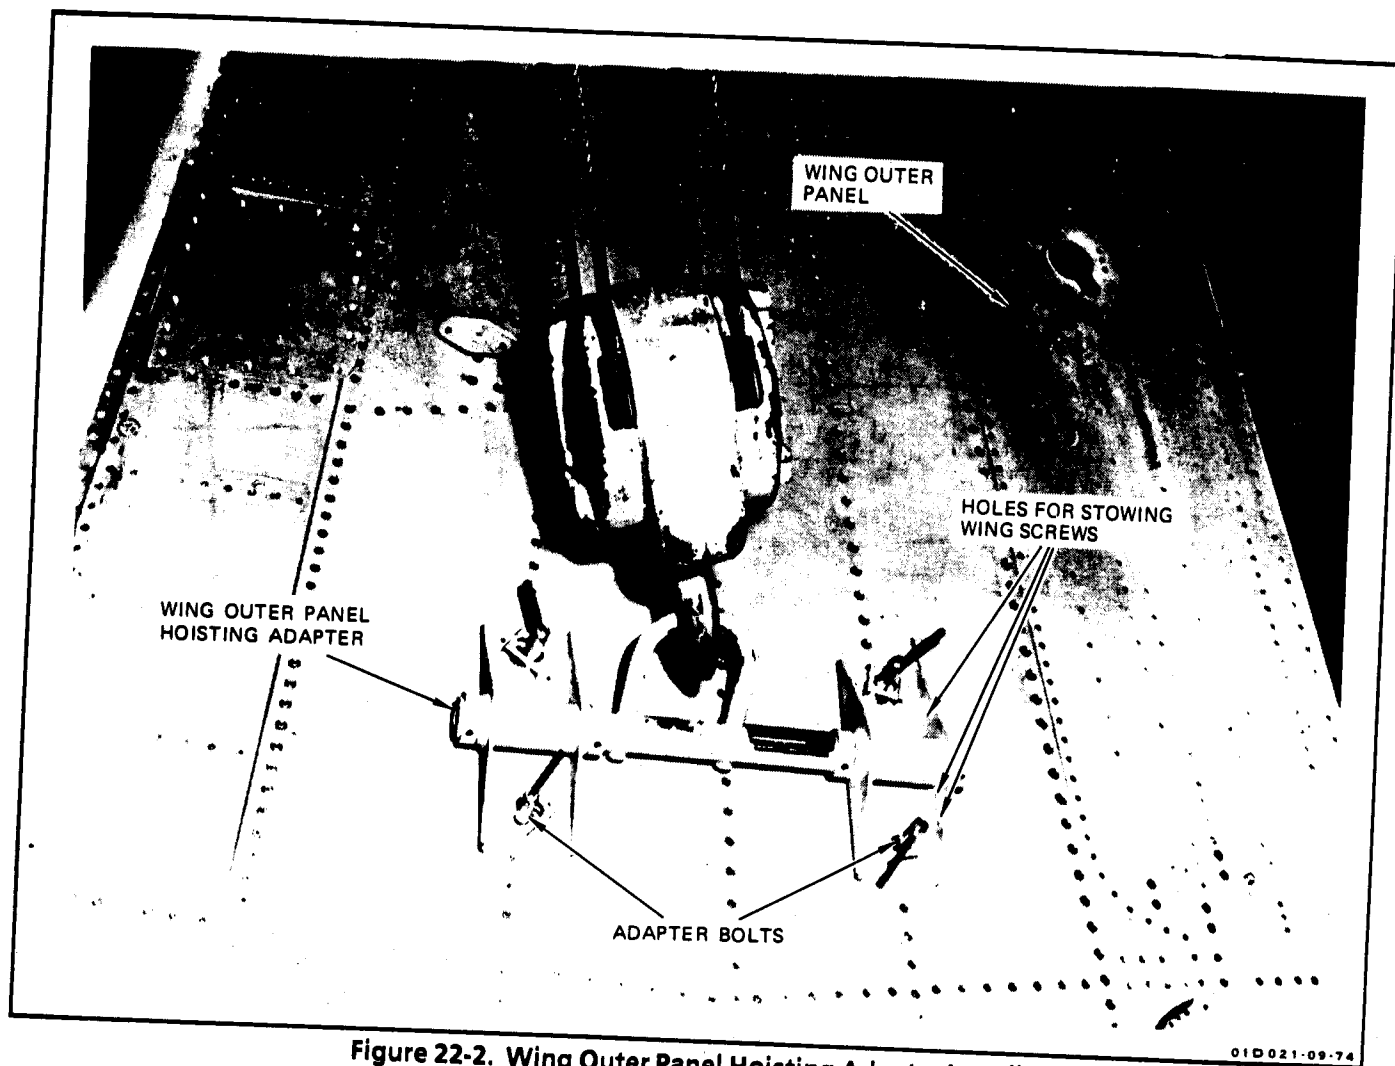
Wing Outer Panel Hoisting Adapter Installation
